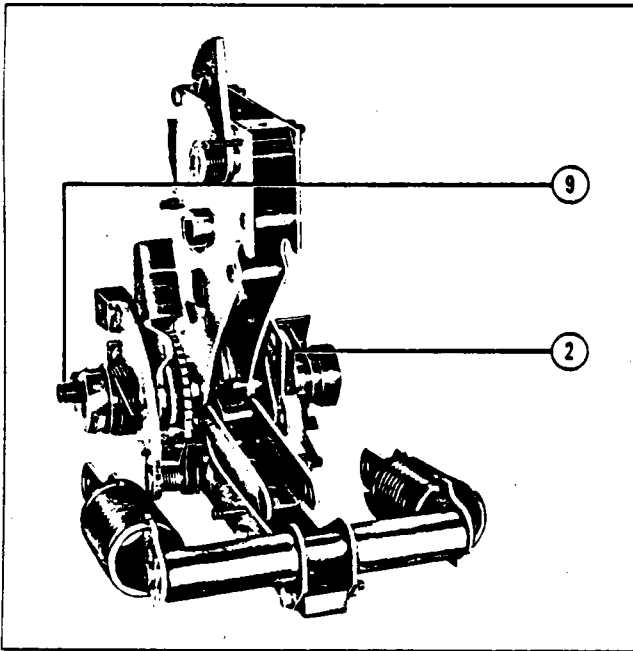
Lubrication Points on Right Side of Mechanism (385303)
